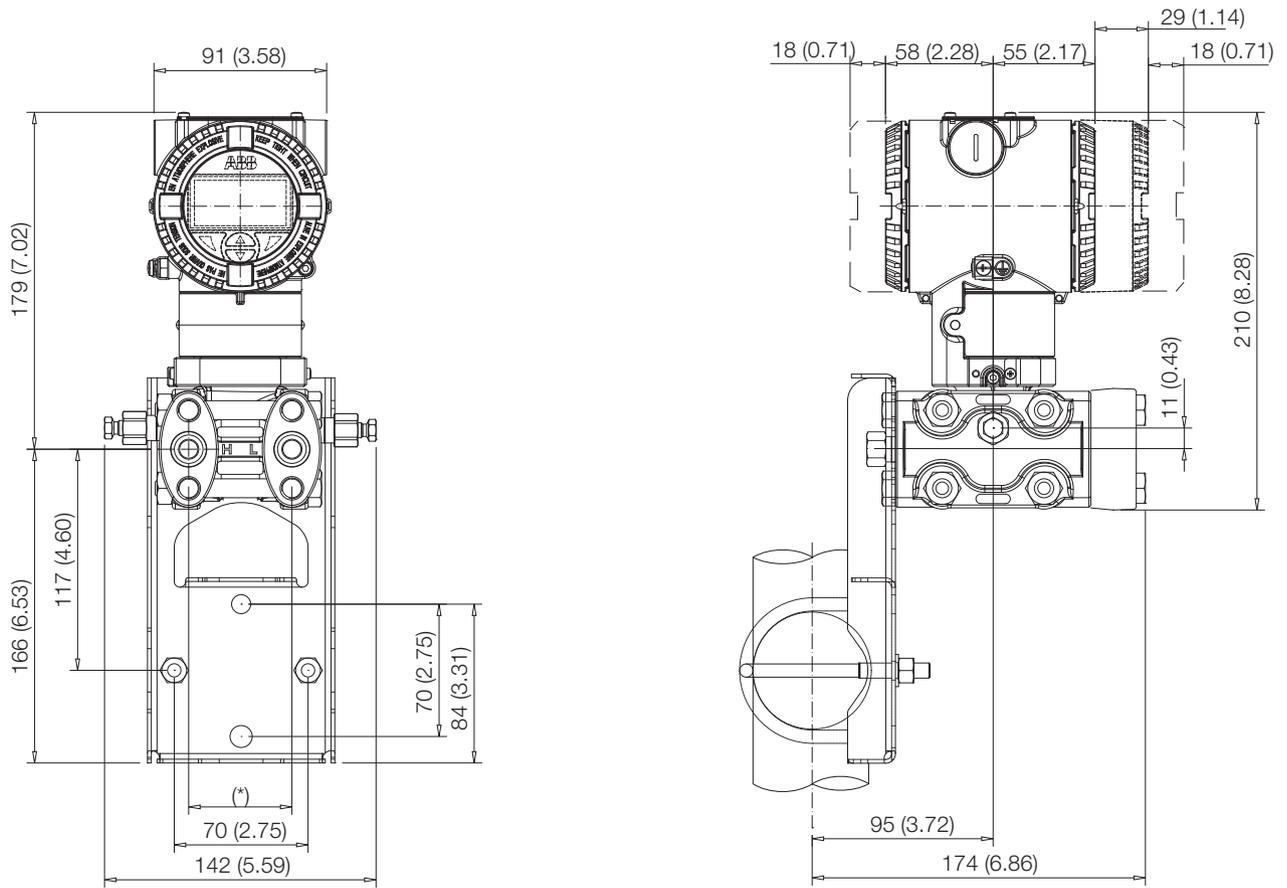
Differential Pressure Style transmitter with barrel housing installed on a box pipe with optional bracket for SST housing (B5)
